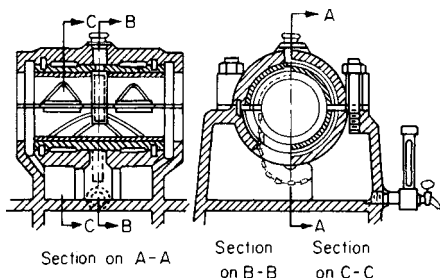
Split bearing with one chain. Main crankshaft bearing; vertical oil engine.
